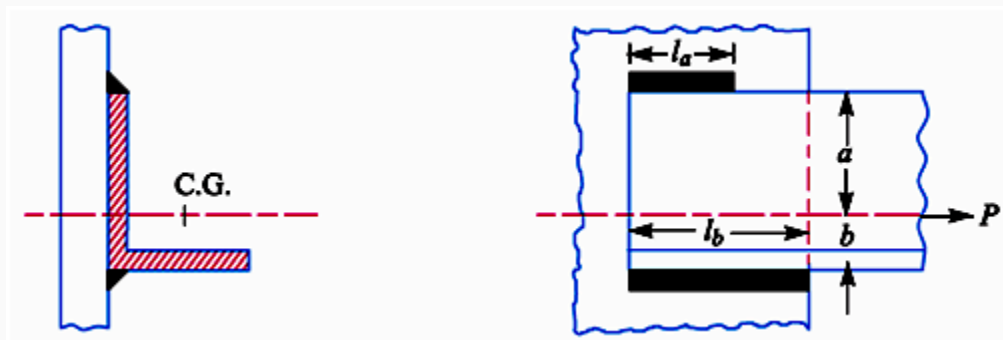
Axially Loaded Unsymmetrical Welded Sections
